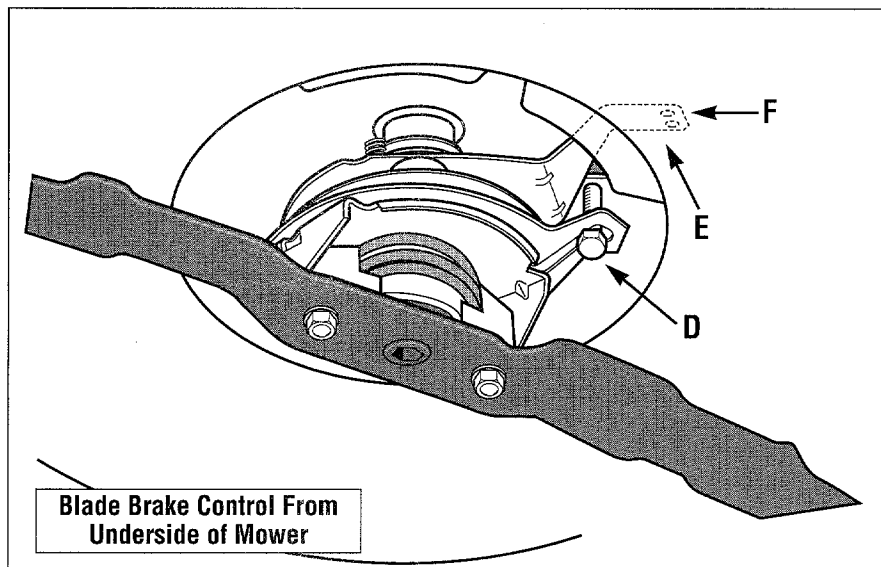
Blade Brake Control shoulder bolt and arm.
